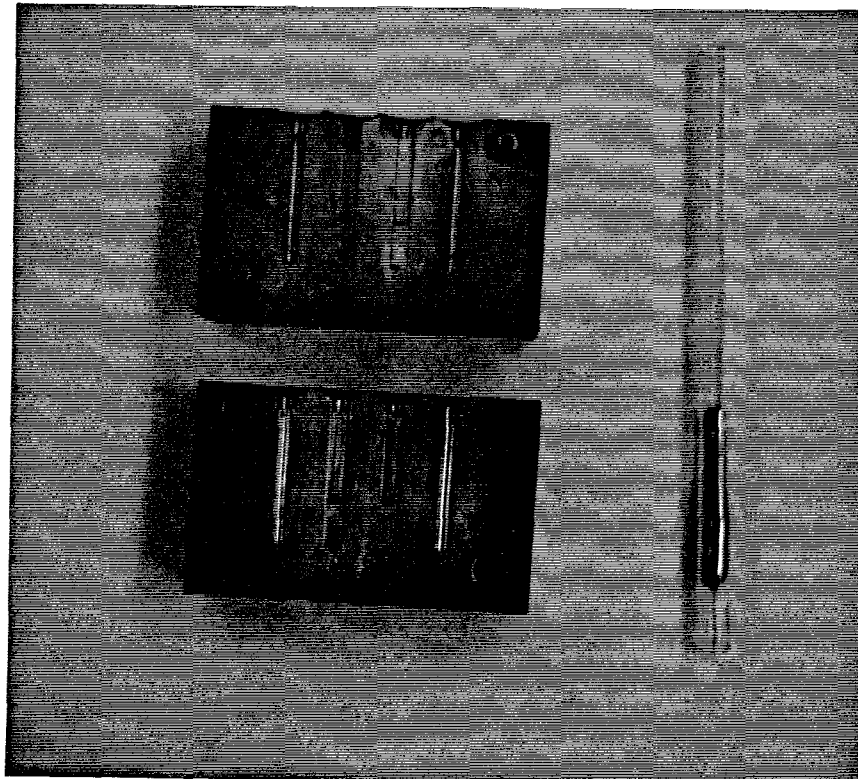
Vycor nozzle and copper mold used to cast cylindrical rod in Figure 13.
